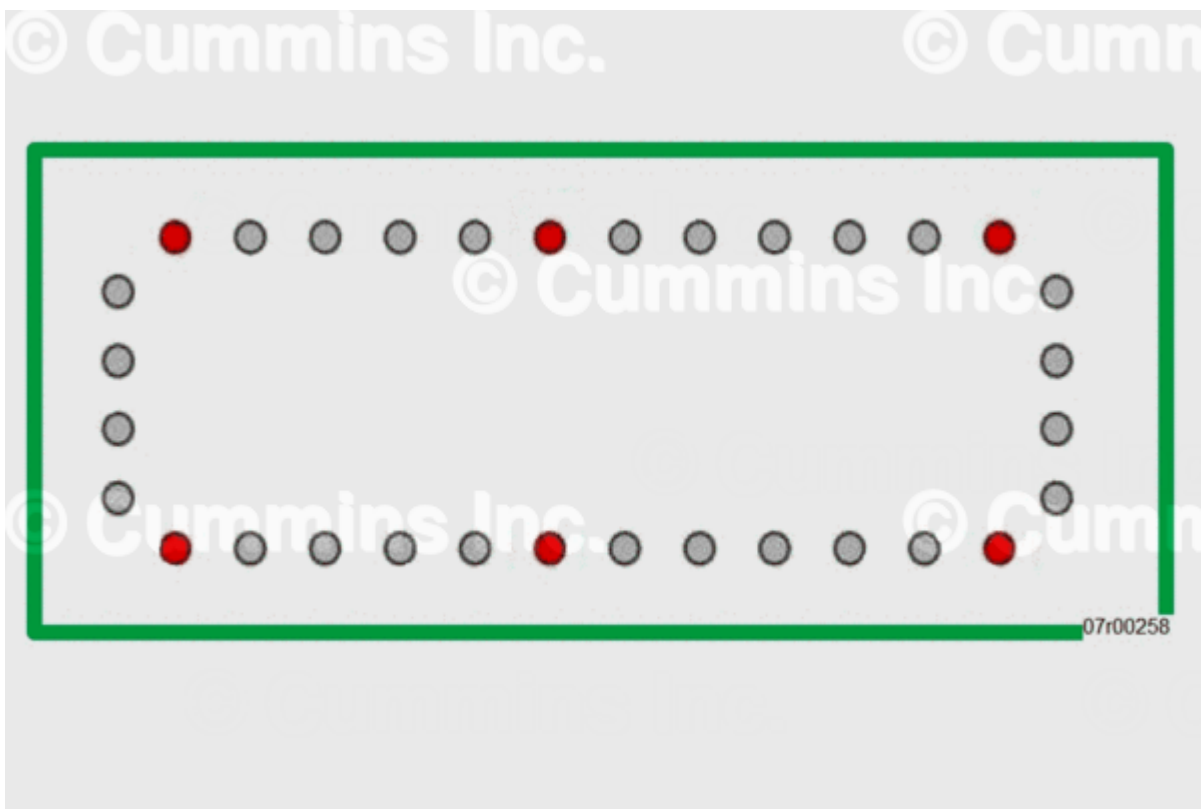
, Lubricating Oil Pan Gasket Assembly Guide Pin Locations.
